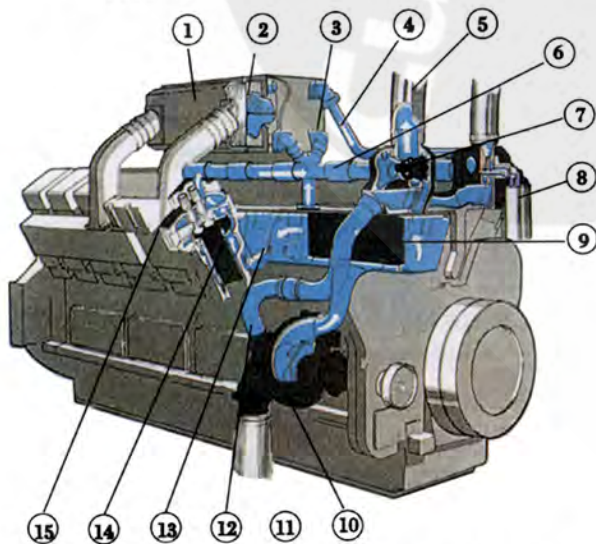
Coolant flow schematic - KTA-50 Engine
